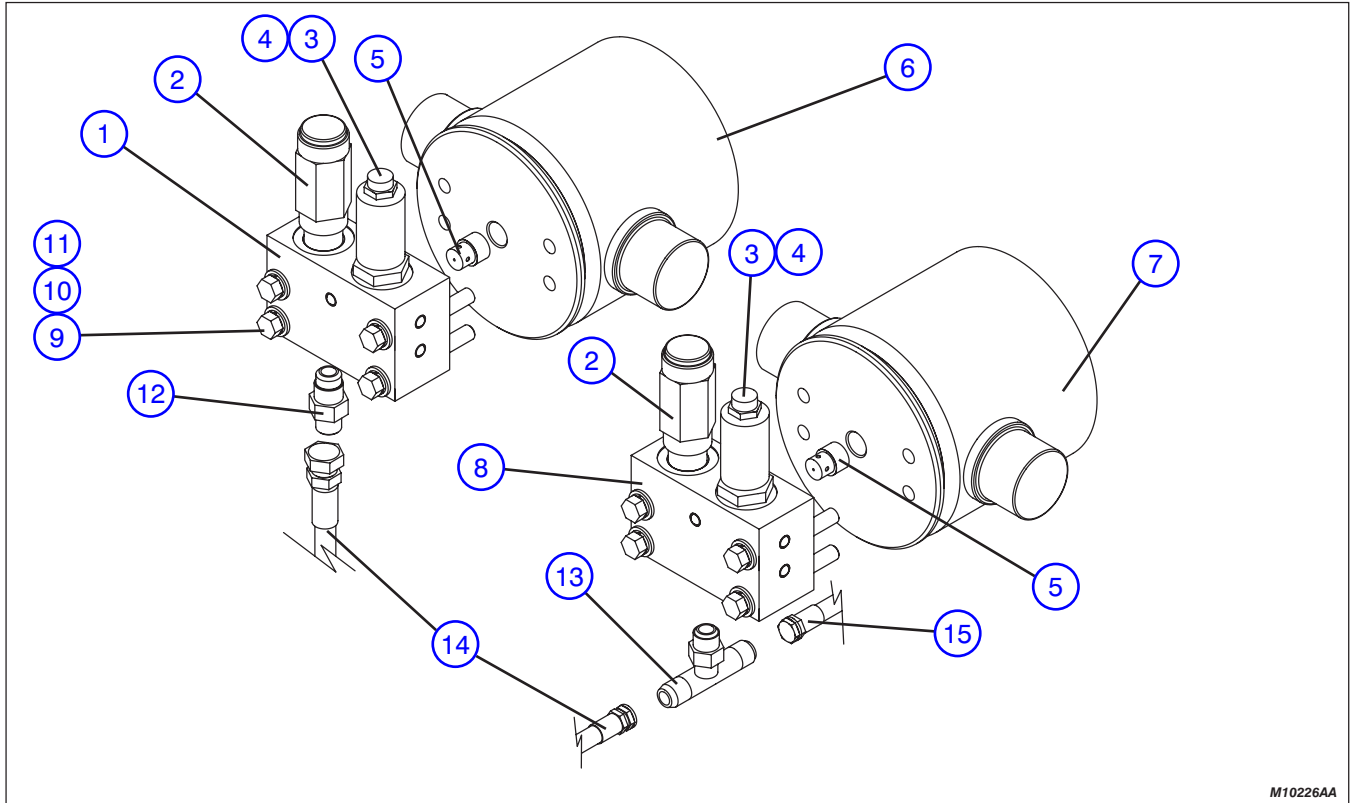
Holding Valve Assembly - Model 3220M
